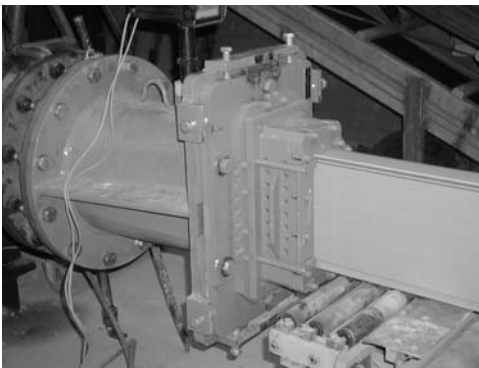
Hydraulically optimized combination pressure head and die assembly for facing tiles
